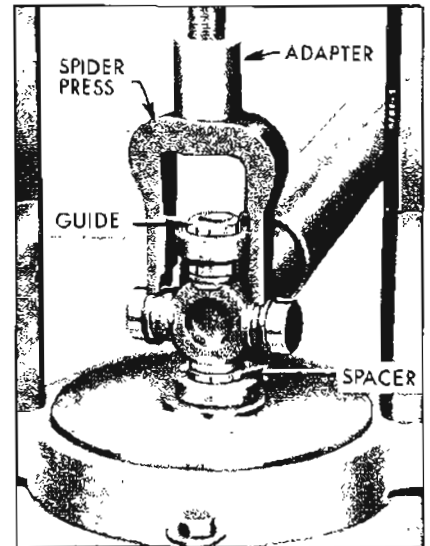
Removing Bearing With Guide and Spacer in Place
